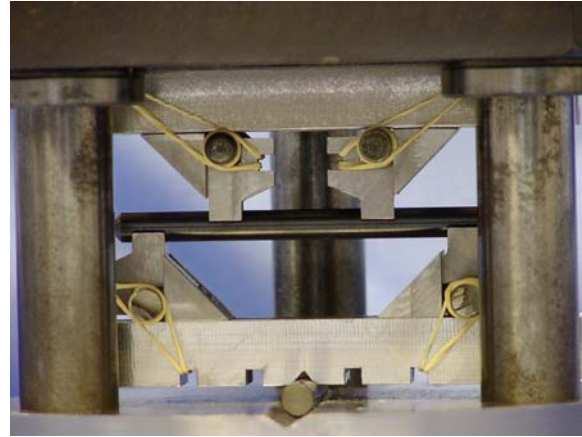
Four-point-bend fixture used to flexure-strength-test cylindrical or half-RCF or half-RBS specimens.
